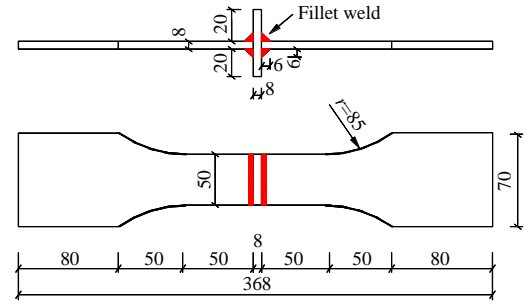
Geometrical dimensions of the Q460C steel fillet weld cruciform joints
